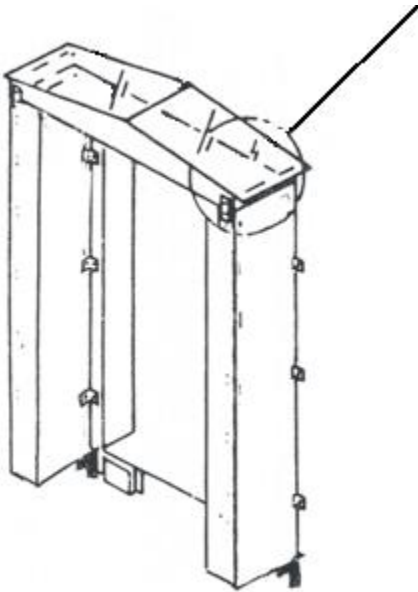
MOUNTING HEADER TO VERTICAL PANELS
